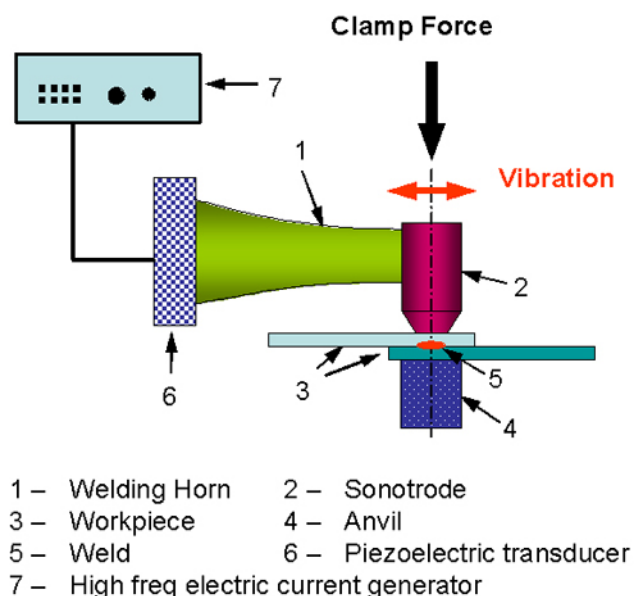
Schematic setup of ultrasonic welding process.
